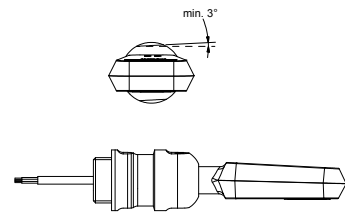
pms sensor D12-adapter shaft with sensor screw connection BF-pms/A1, all surfaces must be inclined at least 3°.
